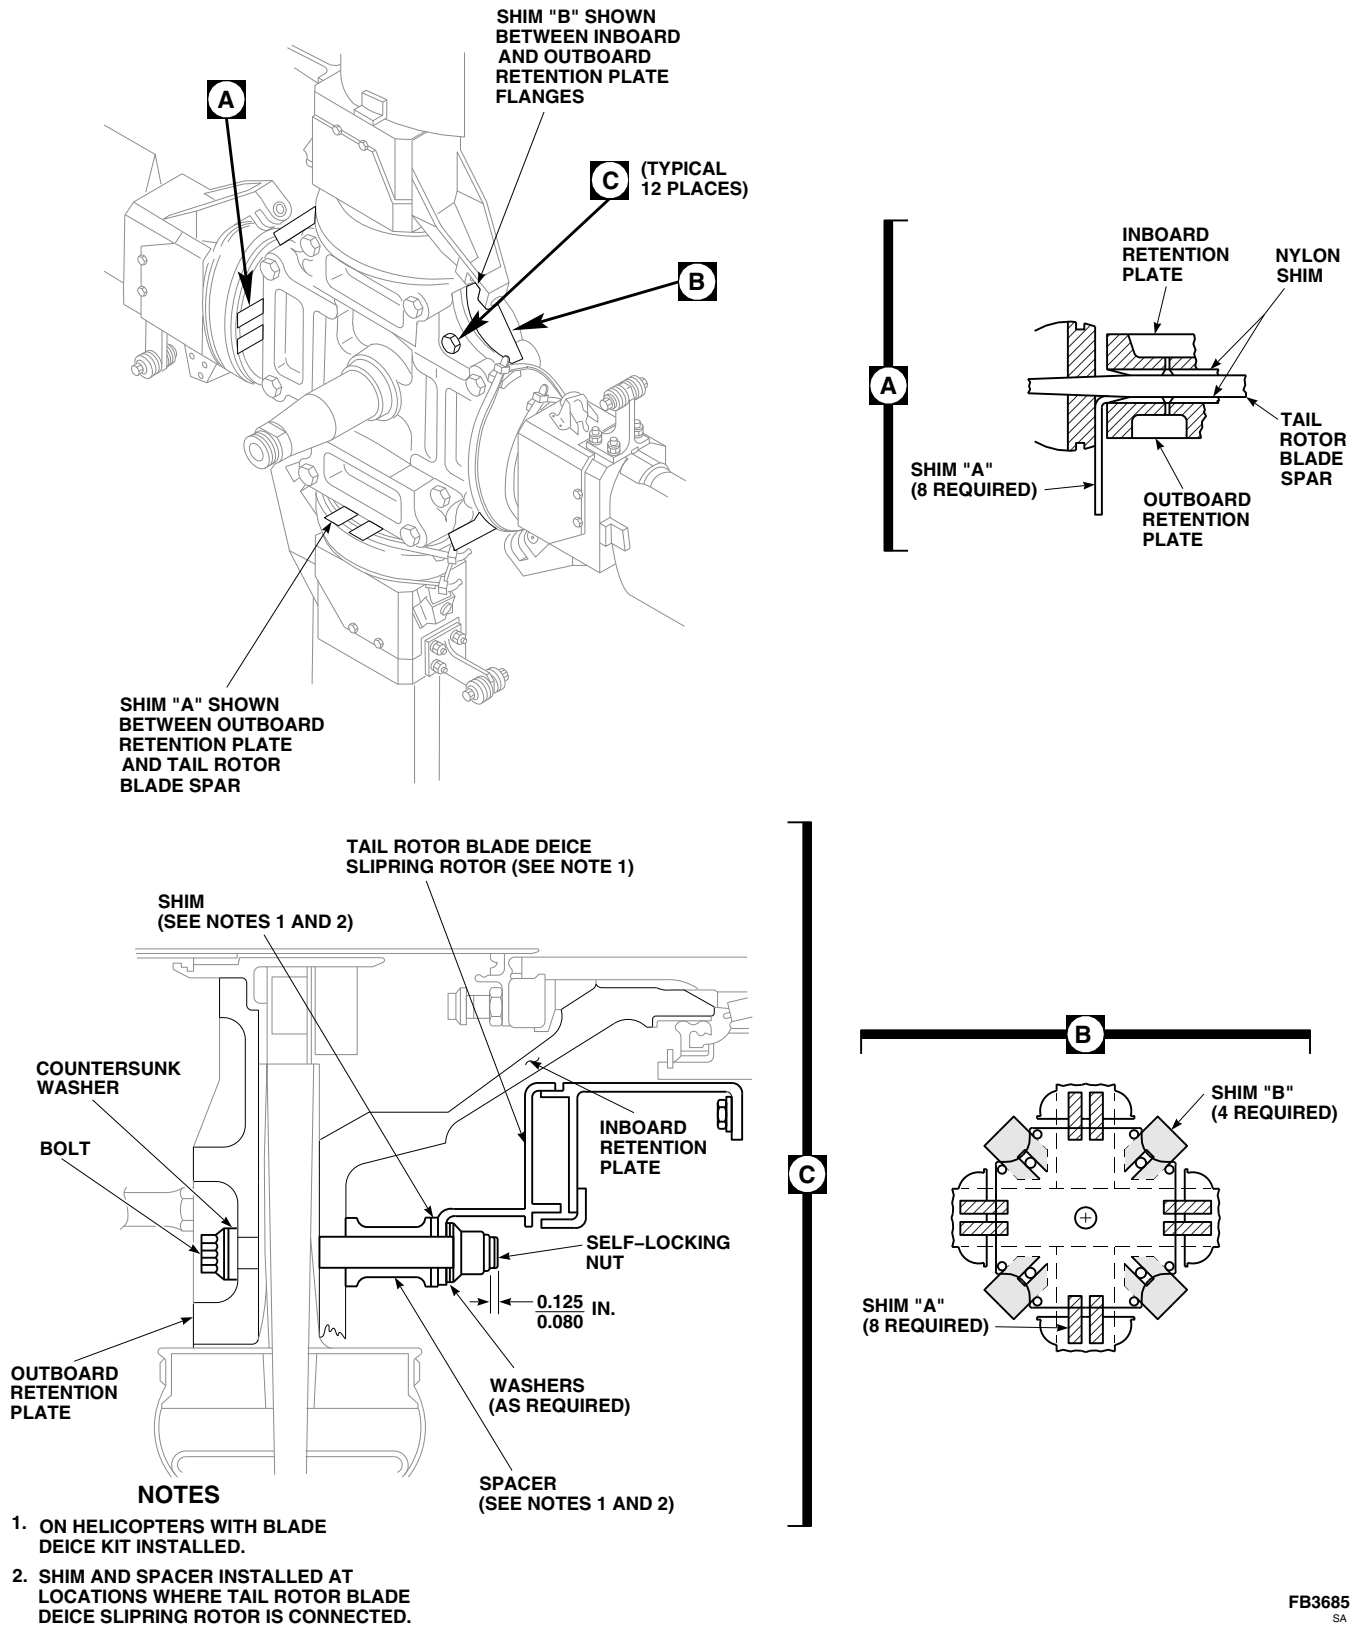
SHIM TAIL ROTOR BLADES
